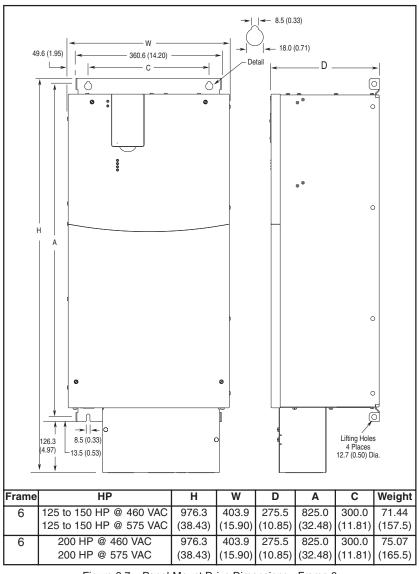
Panel-Mount Drive Dimensions - Frame 6
